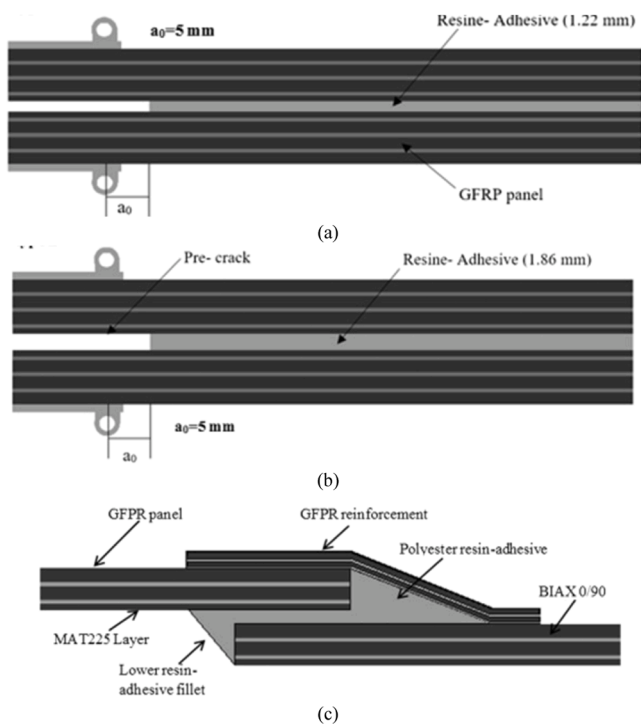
Joints tested (a) Double Cantilever Beams adhesive 1.22 mm (b) Double Cantilever Beams adhesive 1.86 (c) Single Lap Joint [93].
